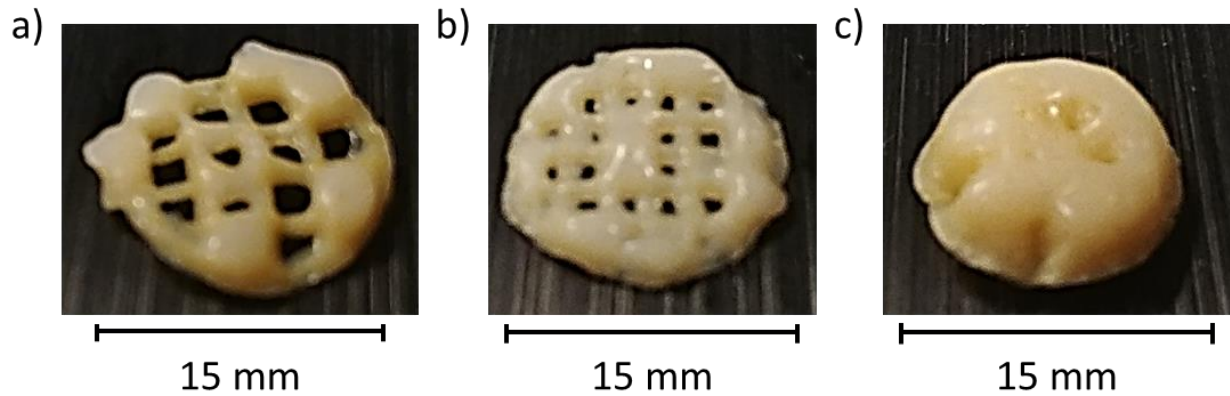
Pictures of final manufactured and post-processed parts after 20 layers.
